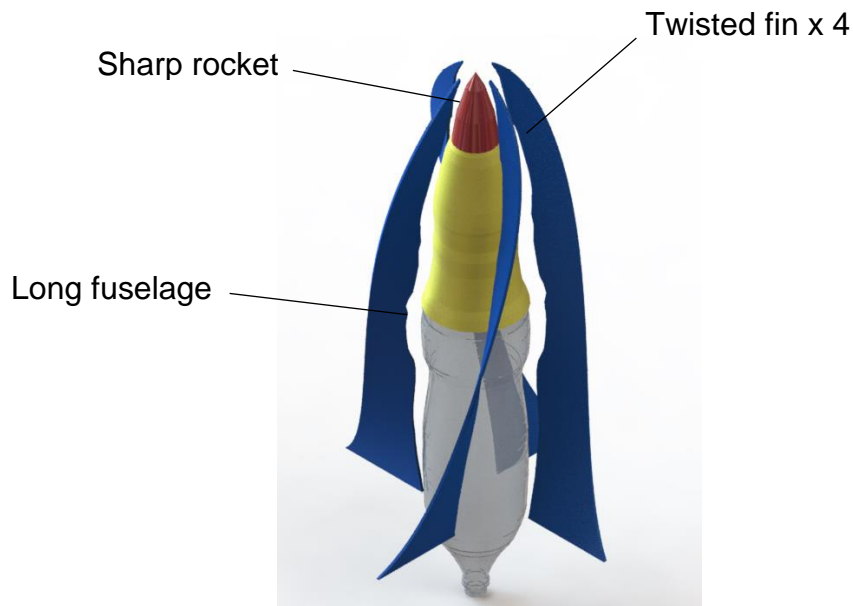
Exploded view of twisted fin rocket CAD model
